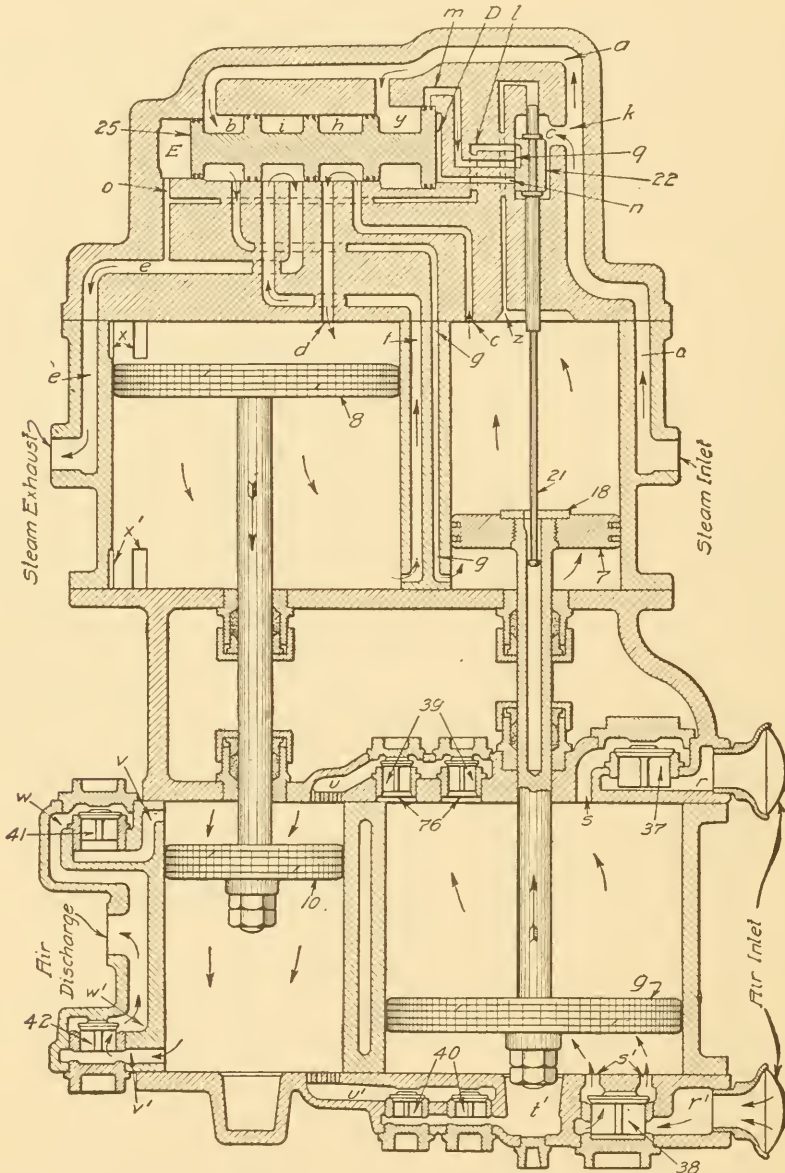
Diagram of Westinghouse $8\frac{1}{2}$ -Inch Cross-Compound Compressor, Showing High-Pressure Steam (Low-Pressure Air) Piston on the Up-Stroke
